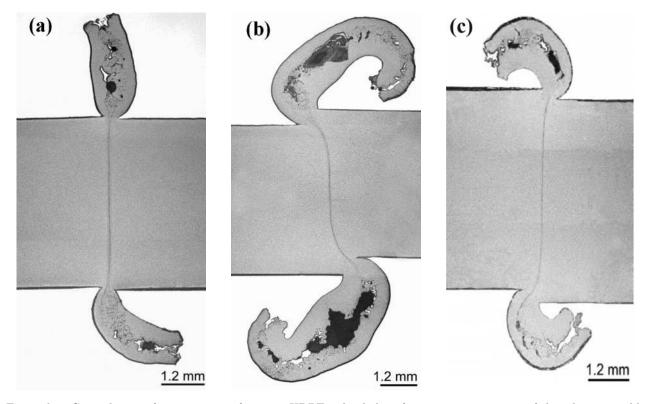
,b,c. General view of cross-section of joint in HDPE polyethylene for various parameters of the vibration welding process.
